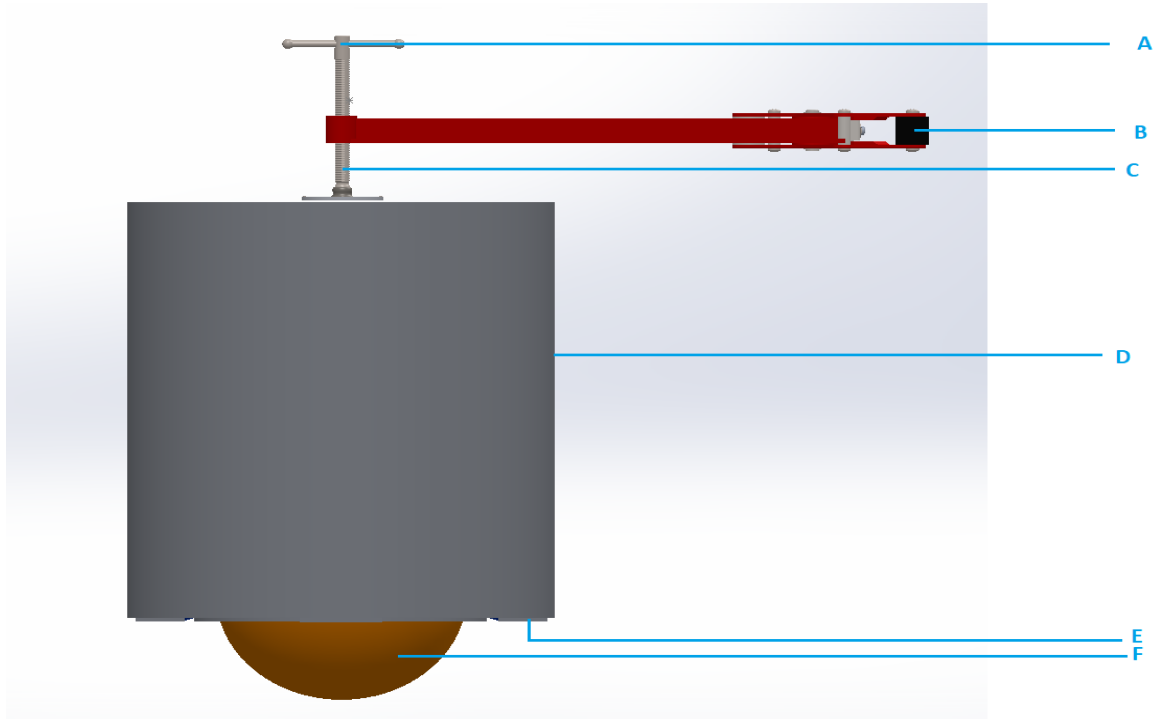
External mechanical design of the attachment with clamps (front view) [2][3][4]
